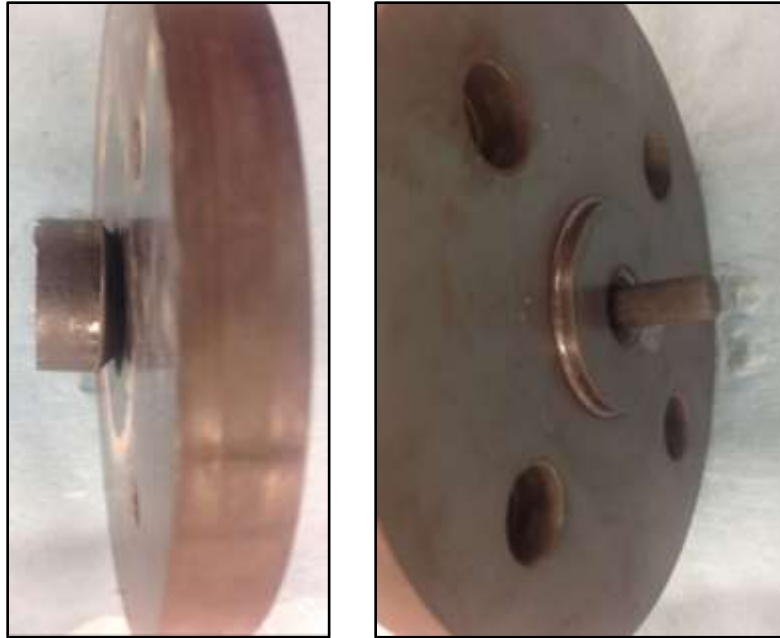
Partially extruded U-10Zr rod from extrusion 6
